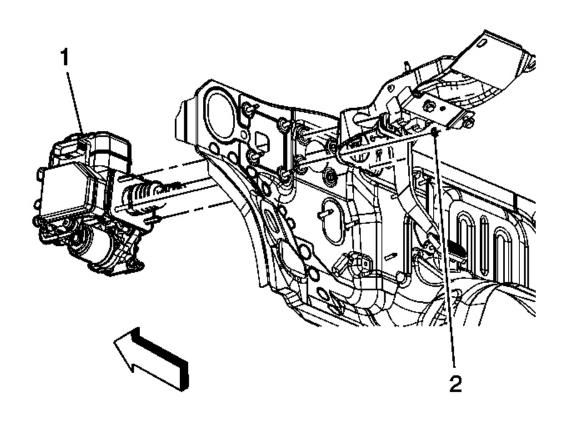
Master Cylinder Removal/Installation Courtesy of GENERAL MOTORS CORP.
